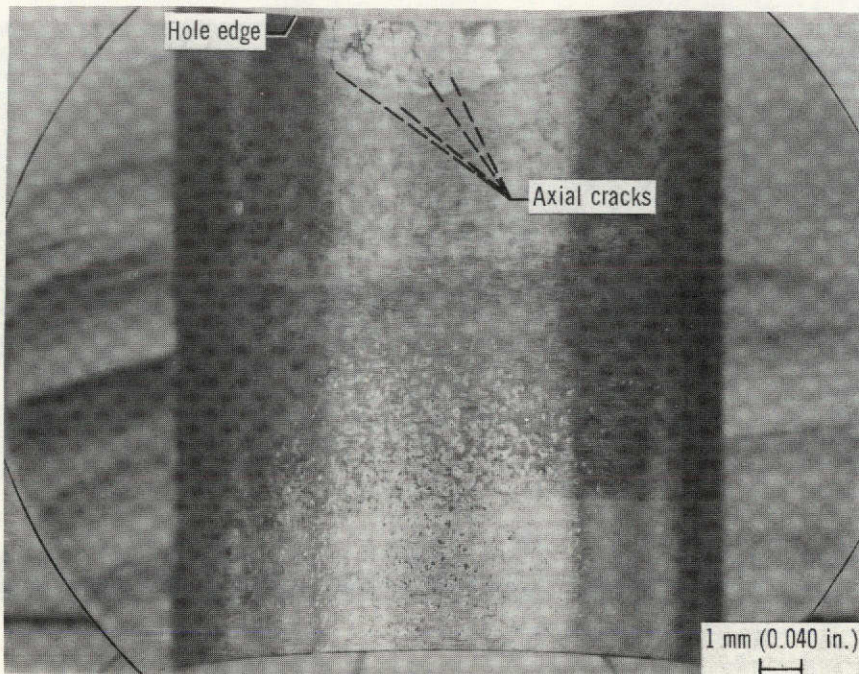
Half section of drilled ball from bearing 377A, showing pitted hole surface and axial cracks near hole edge.
